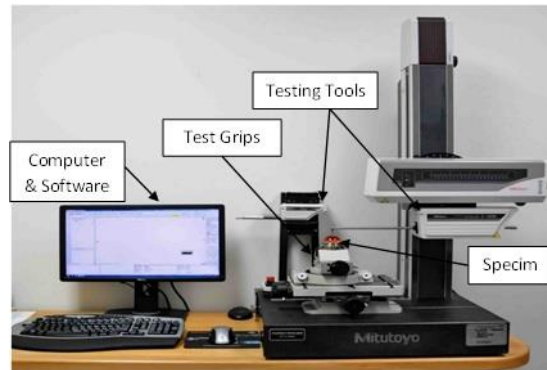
Surface Roughness Testing Machine Type Mitutoyo
